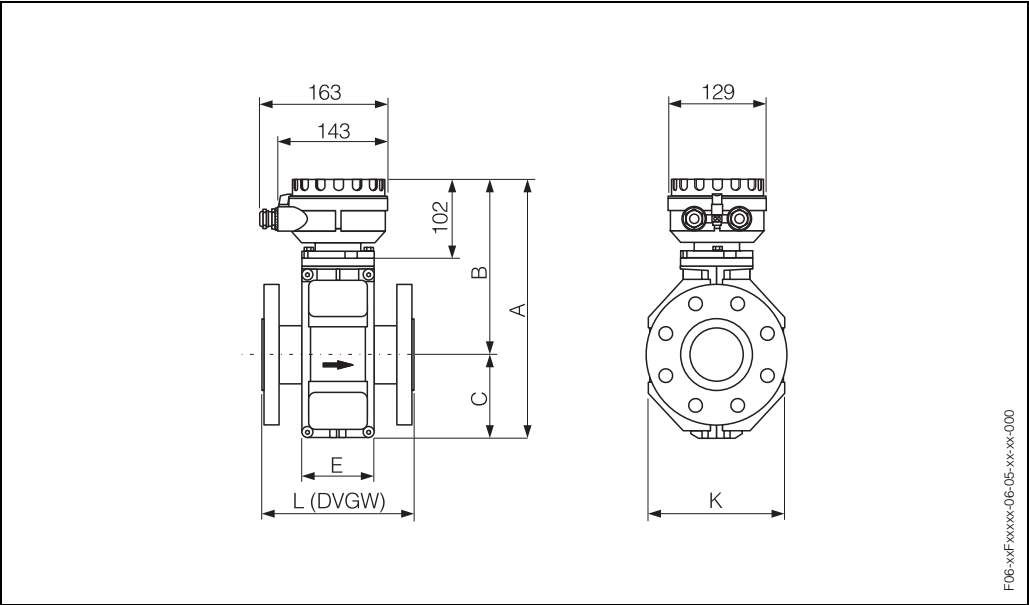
Dimensions Promag P / DN ≤ 300 (remote version)
